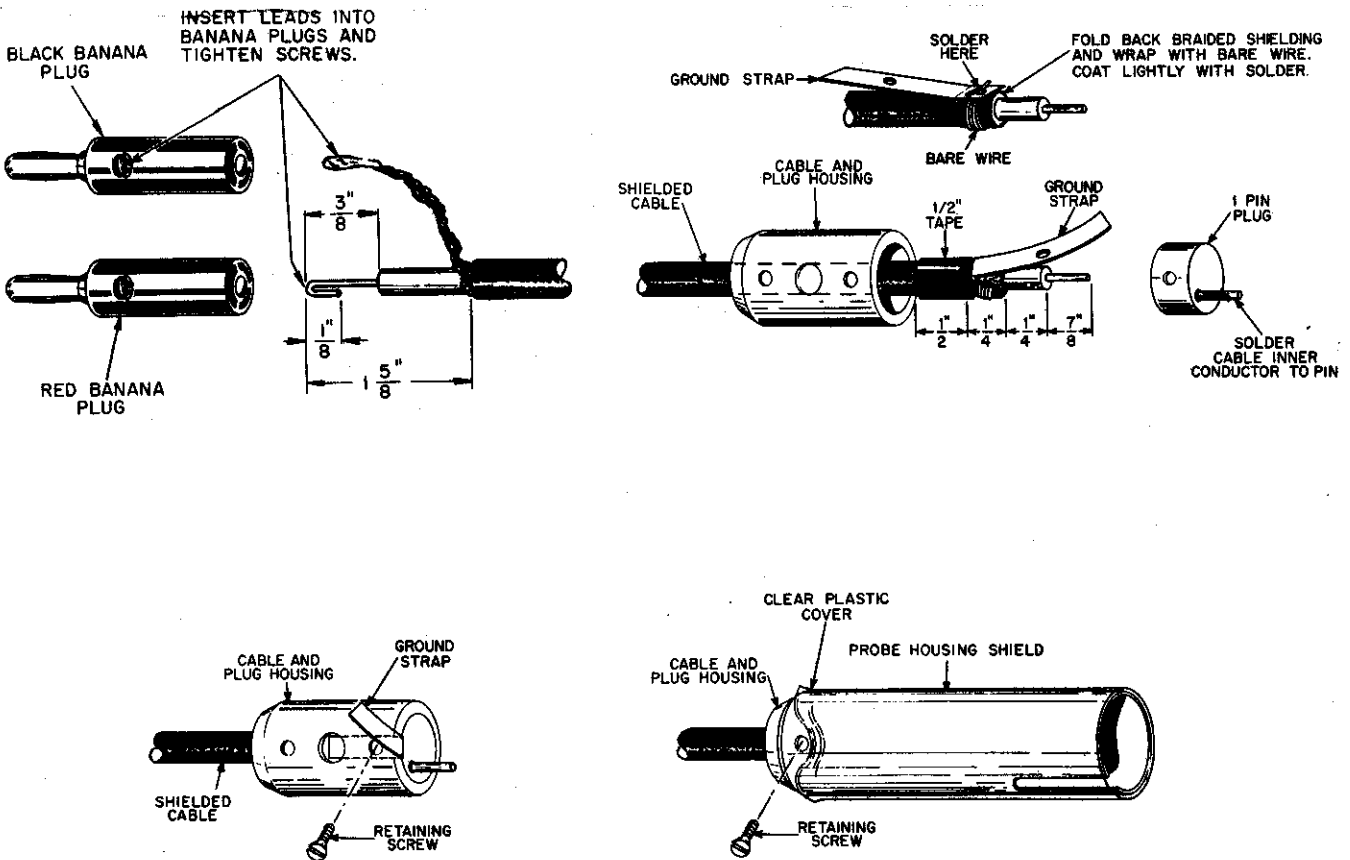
HOW TO PREPARE AND CONNECT THE CABLE
